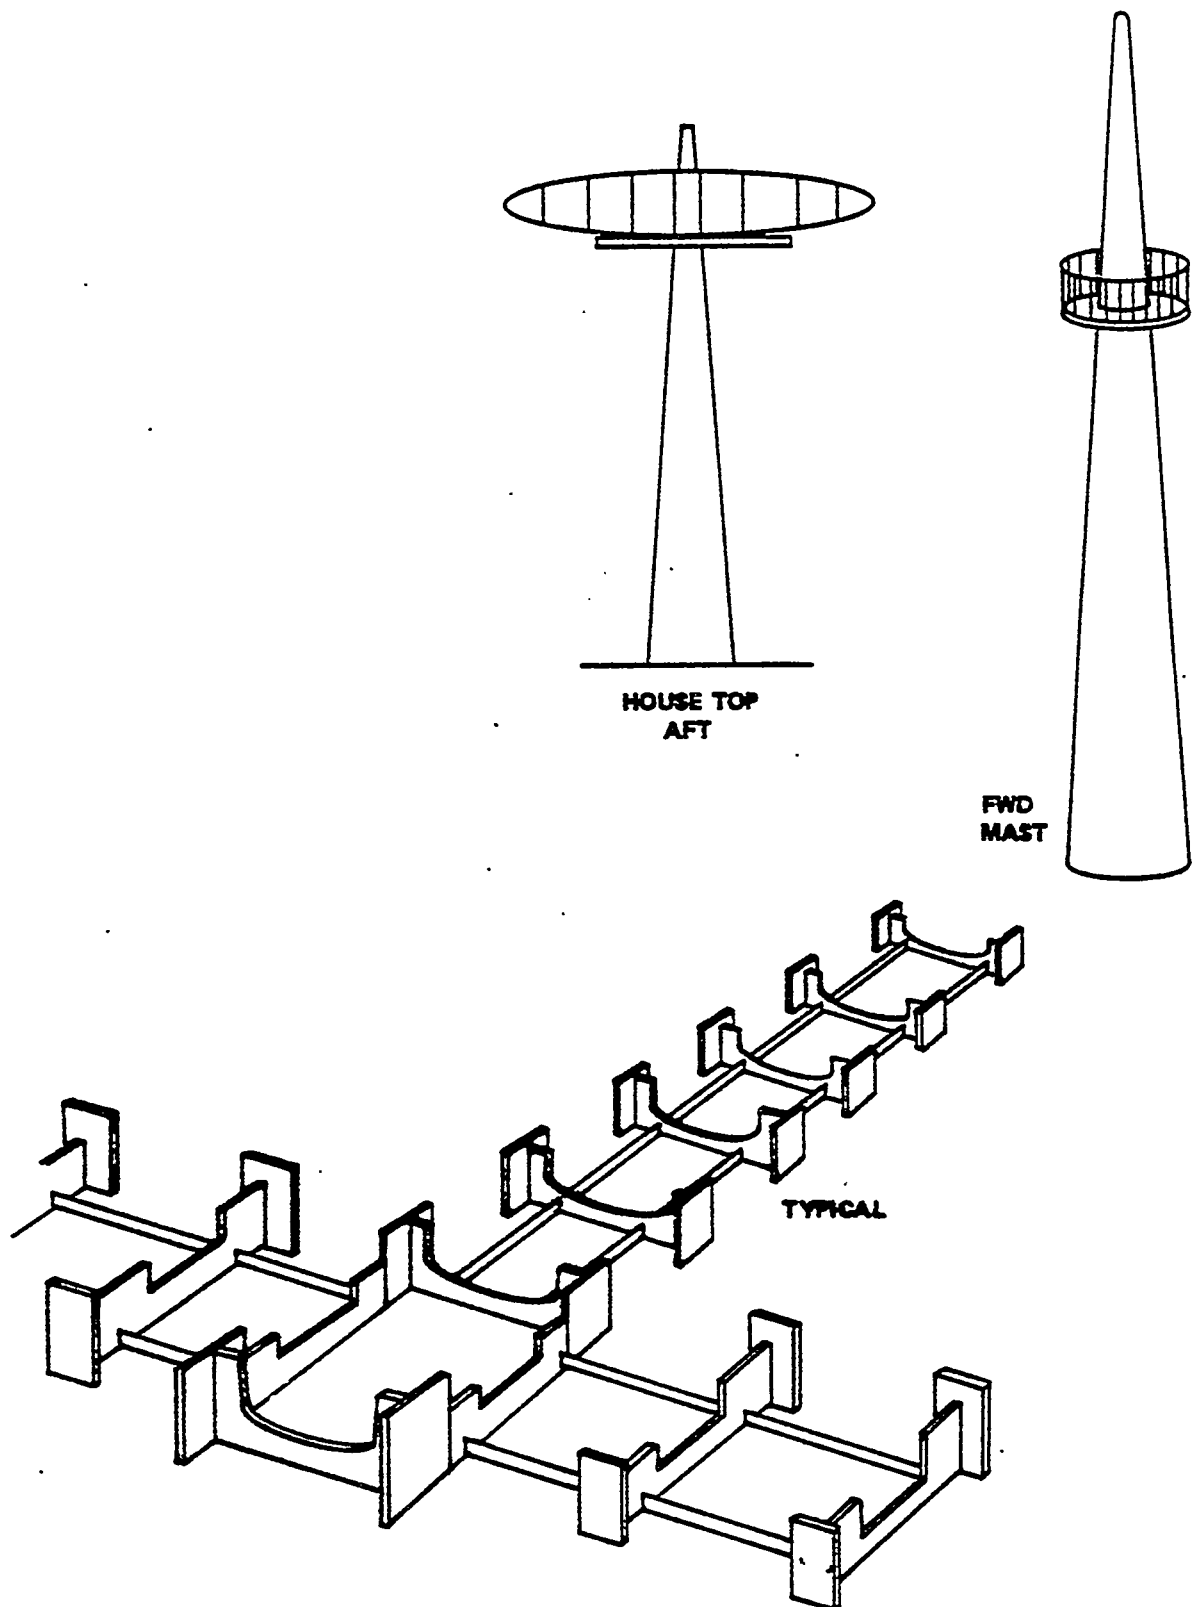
Mast Assembly and Weld Fixture
